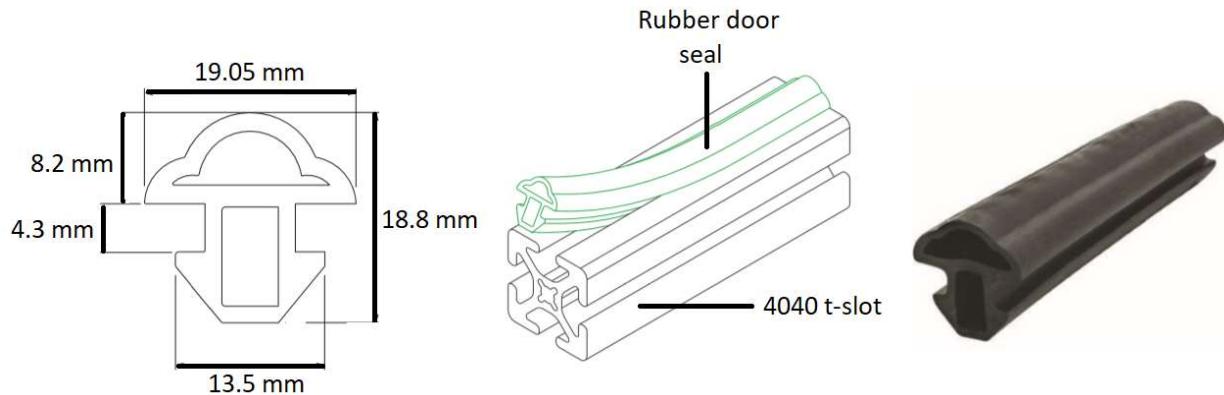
2829 rubber door seal (a) Cross-section (b) Insertion schematic (c) Photo ^[18]
